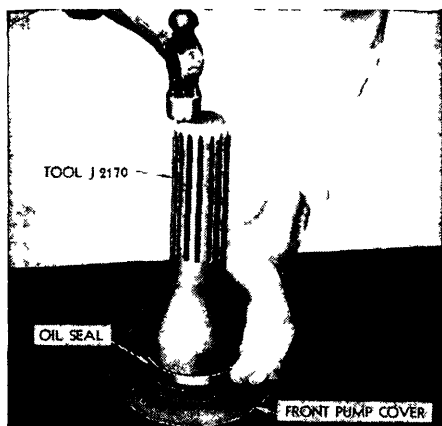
Install new seal in pump cover with step side up. Then drive seal in place. Apply sealing compound around edge of cover and seal
